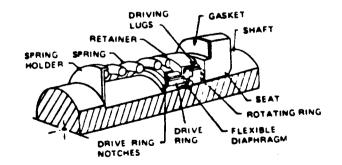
CRANE Type 21 Mechanical Seal Assembly.
